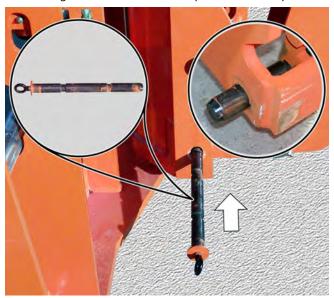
Insert Quick Attach Pin Through Attachment and Quick Attach Adapter.
